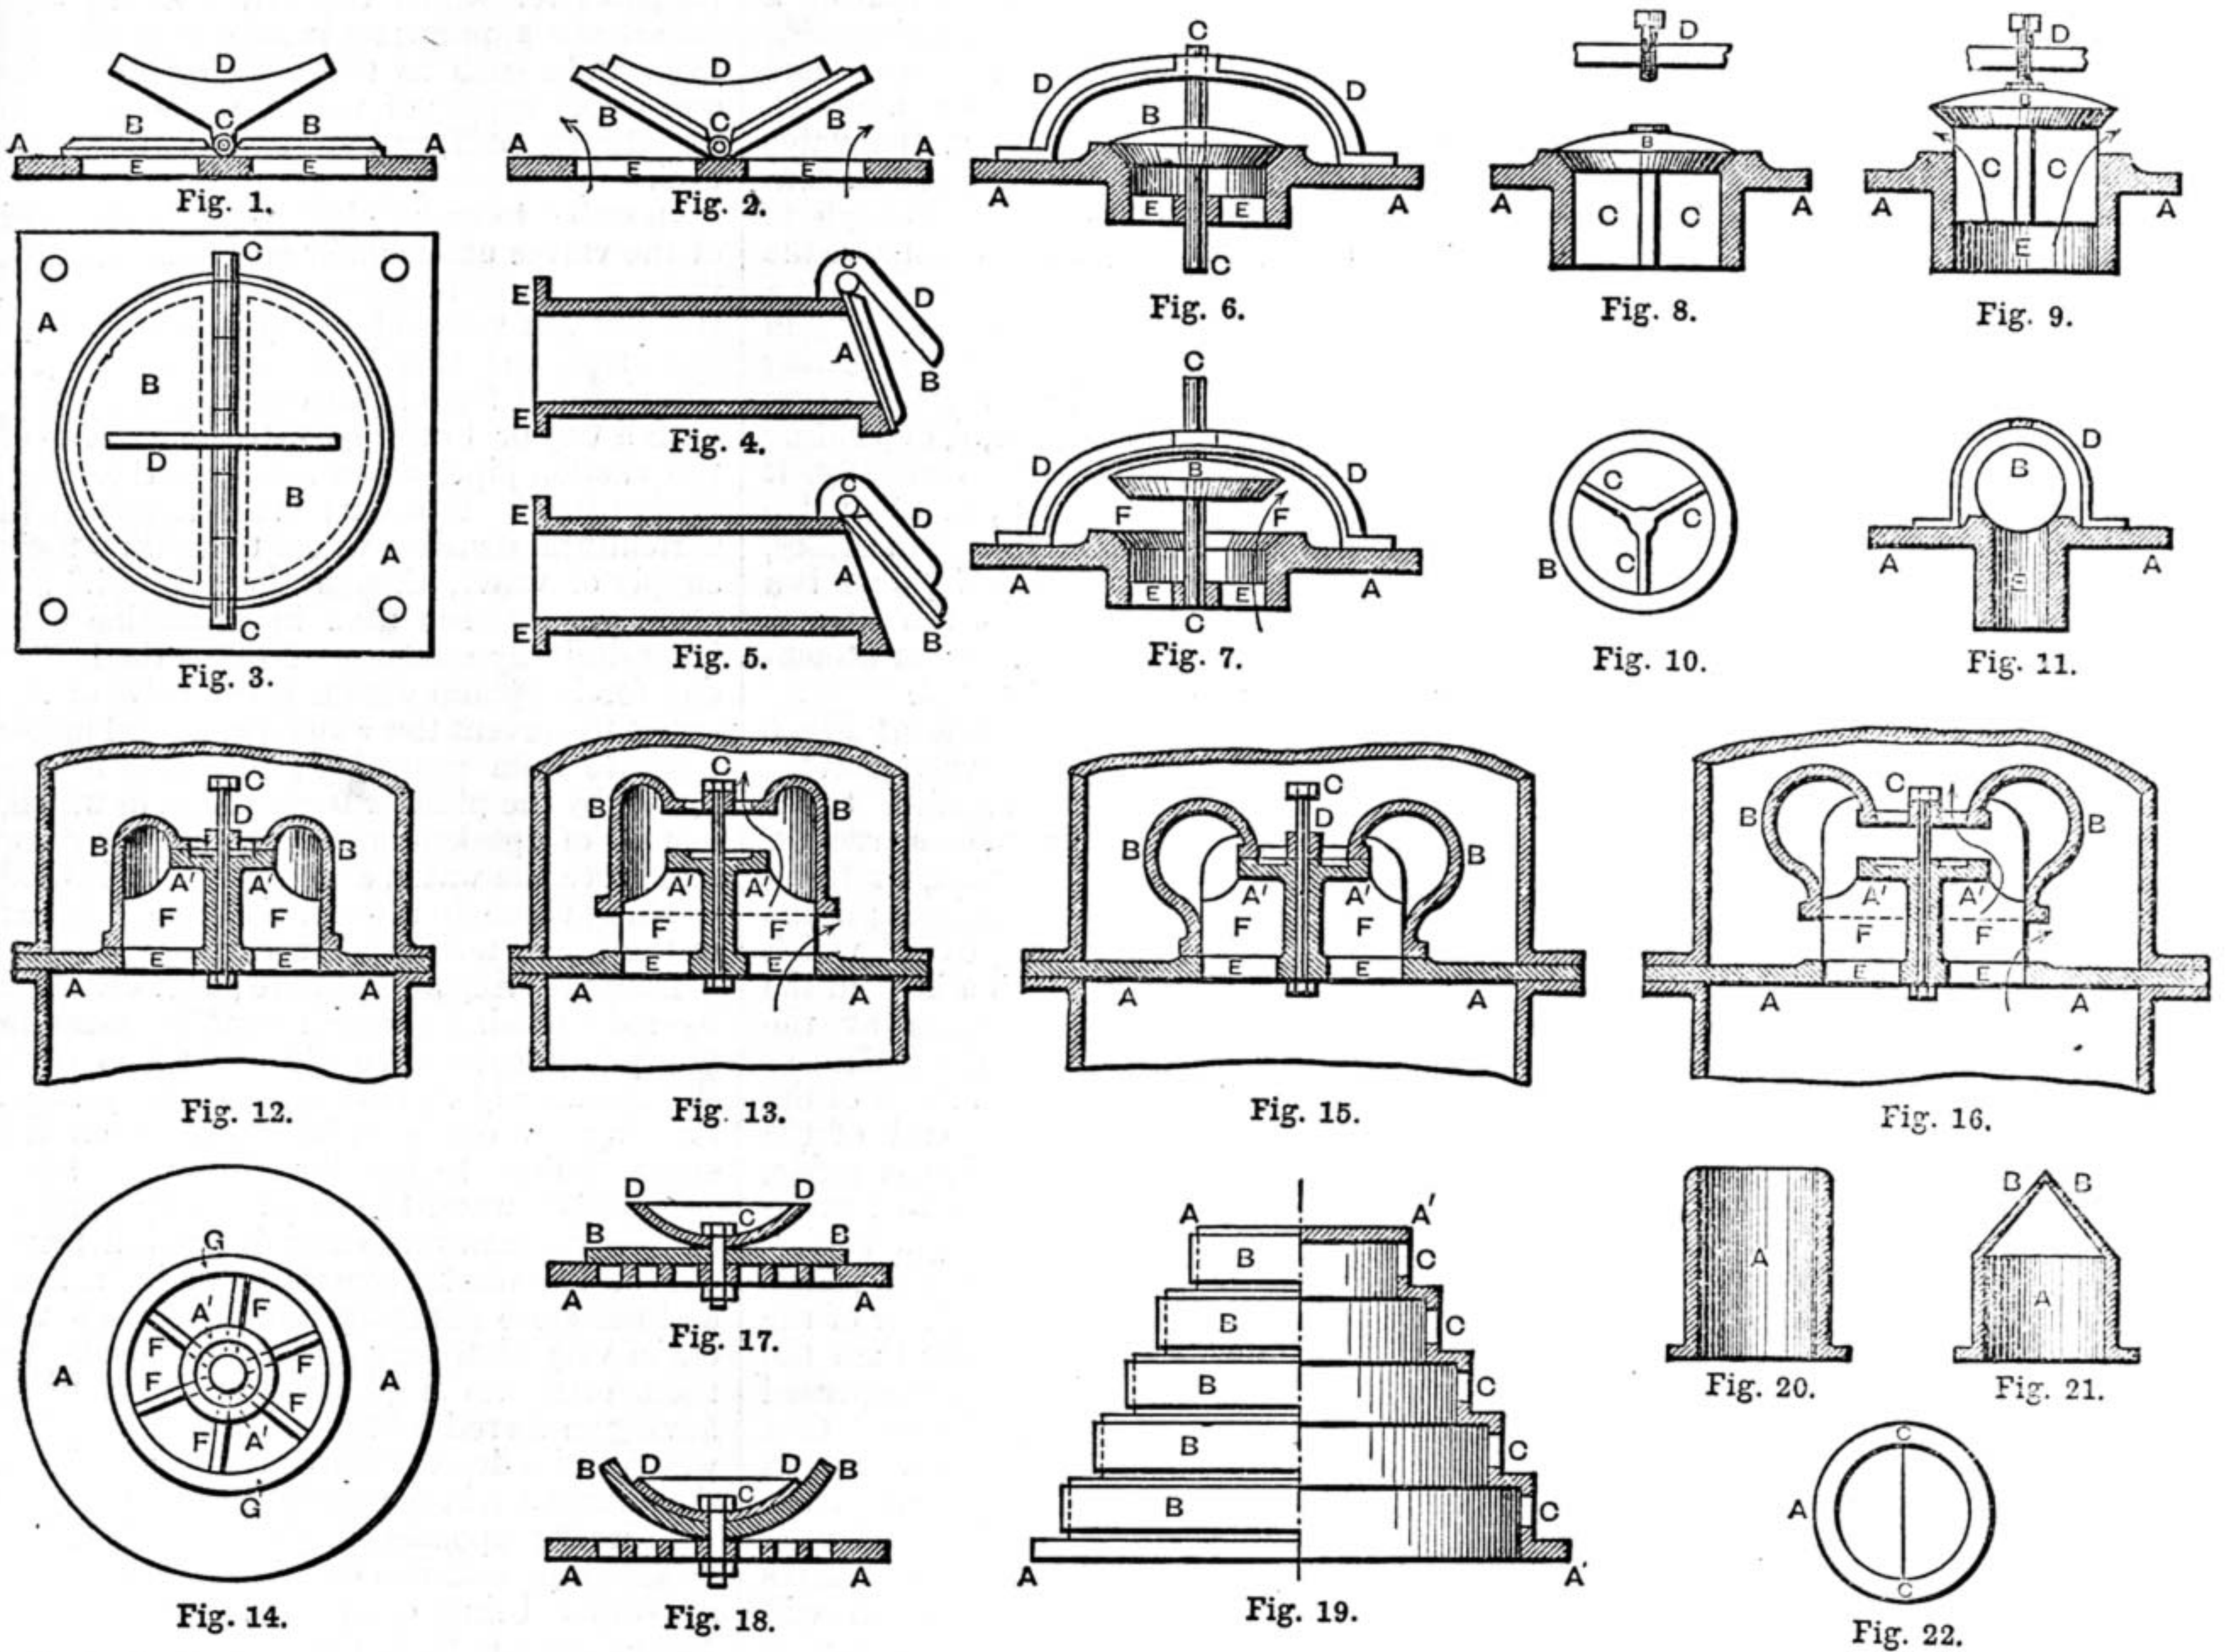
Butterfly Valve Shut: Seat in Section. Fig. 2.—Butterfly Valve Open: Seat in Section. Fig. 3.—Butterfly Valve: Plan. Fig. 4.—Flap Valve Shut: Seat in Section. Fig. 5.—Flap Valve Open: Seat in Section. Fig. 6.—Stem Valve Shut: Seat in Section. Fig. 7.—Stem Valve Open: Seat in Section. Fig. 8.—Stalk Valve Shut: Seat in Section. Fig. 9.—Stalk Valve Open: Seat in Section. Fig. 10.—Stalk Valve: Underside. Fig. 11.—Ball Valve: Seat in Section. Fig. 12.—Vertical Section of Double Beat Valve Shut. Fig. 13.—Vertical Section of Double Beat Valve Open. Fig. 14.—Plan of Seats of Double Beat Valve. Fig. 15.—Vertical Section of Crown Valve Shut. Fig. 16.—Vertical Section of Crown Valve Open. Fig. 17.—Flat Indiarubber Valve Shut. Fig. 18.—Flat Indiarubber Valve Open. Fig. 19.—Indiarubber Band Valve, half Elevation and half Vertical Section. Figs. 20 and 21.—Vertical Sections, at Right Angles to each other, of Indiarubber Semi-Lunar Valve. Fig. 22.—Plan of Indiarubber Semi-Lunar Valve.
